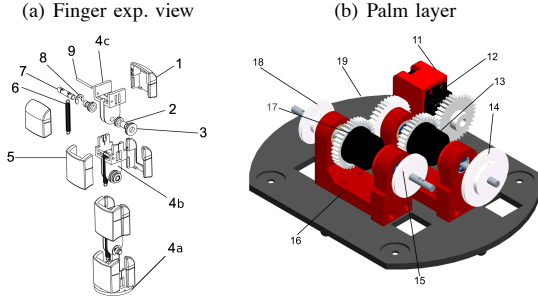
THE Second hand prototype CAD: exploded view of one finger (a), render of one base module (b).
